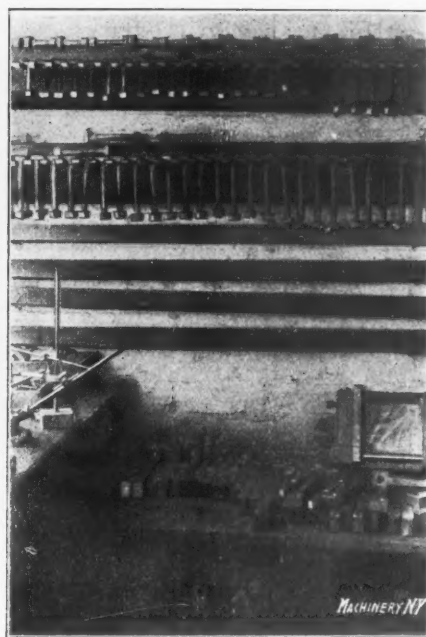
Planer Operator's Corner showing Bolt-racks and Tools
